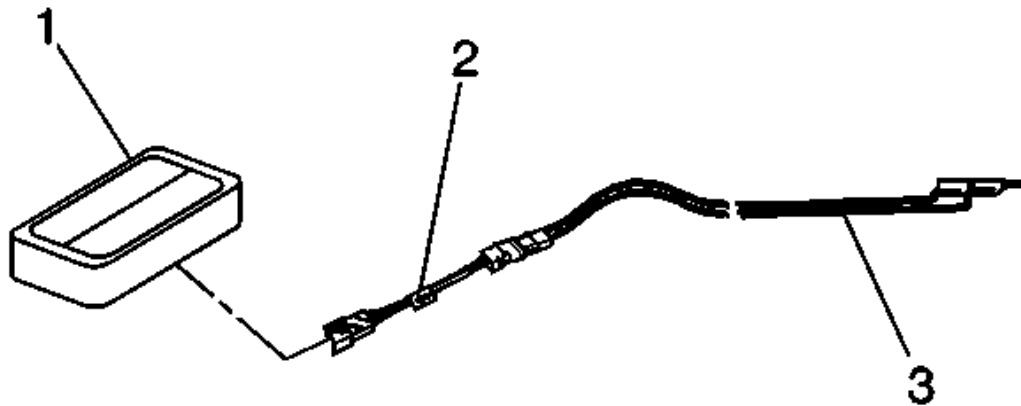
Identifying Inflator Module, SIR Deployment Harness & Adapter
